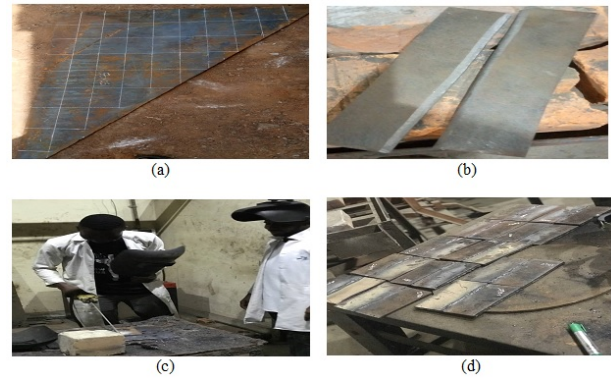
Snapped pictures of (a) AISI 1018 mild steel plate (b) some of the beveled mild steel plates before welding (c) welding of the plates (d) some 8 mm welded butts using a weld gap of 2 mm.
